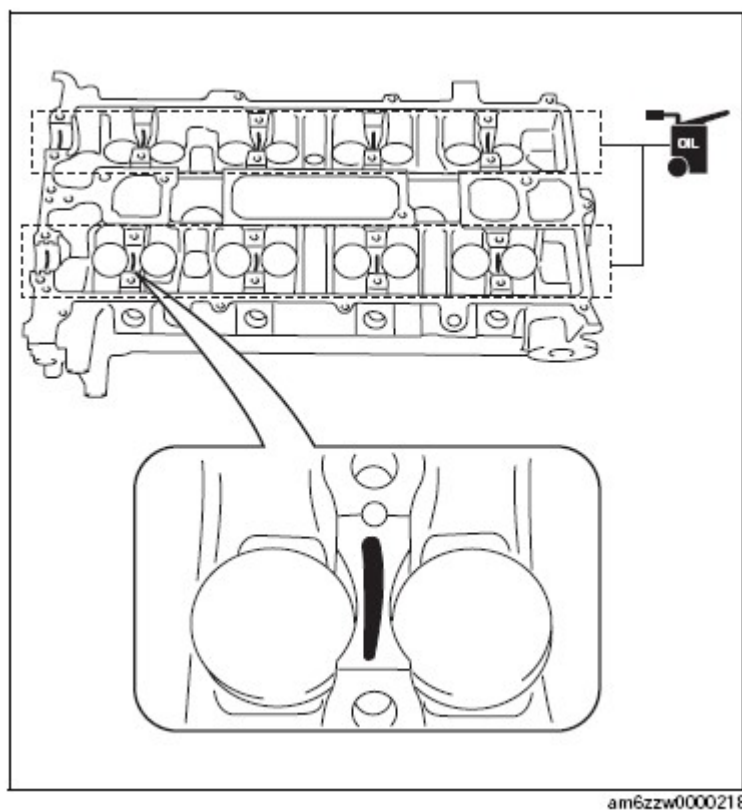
Applying Gear Oil (SAE No.90 Or Equivalent) To Each Journal Of Cylinder Head
